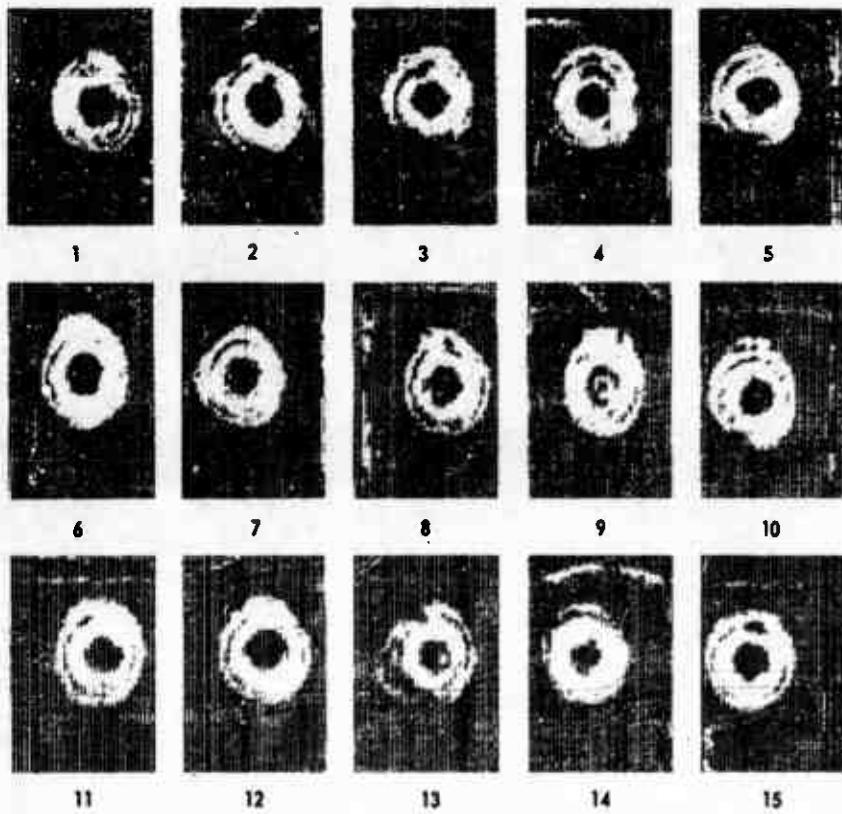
C-Scan Record of Series 7 Welds.
